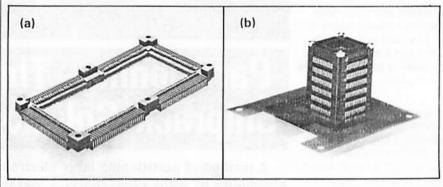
(a) Chiprack connector, (b) Chiprack assembly.
